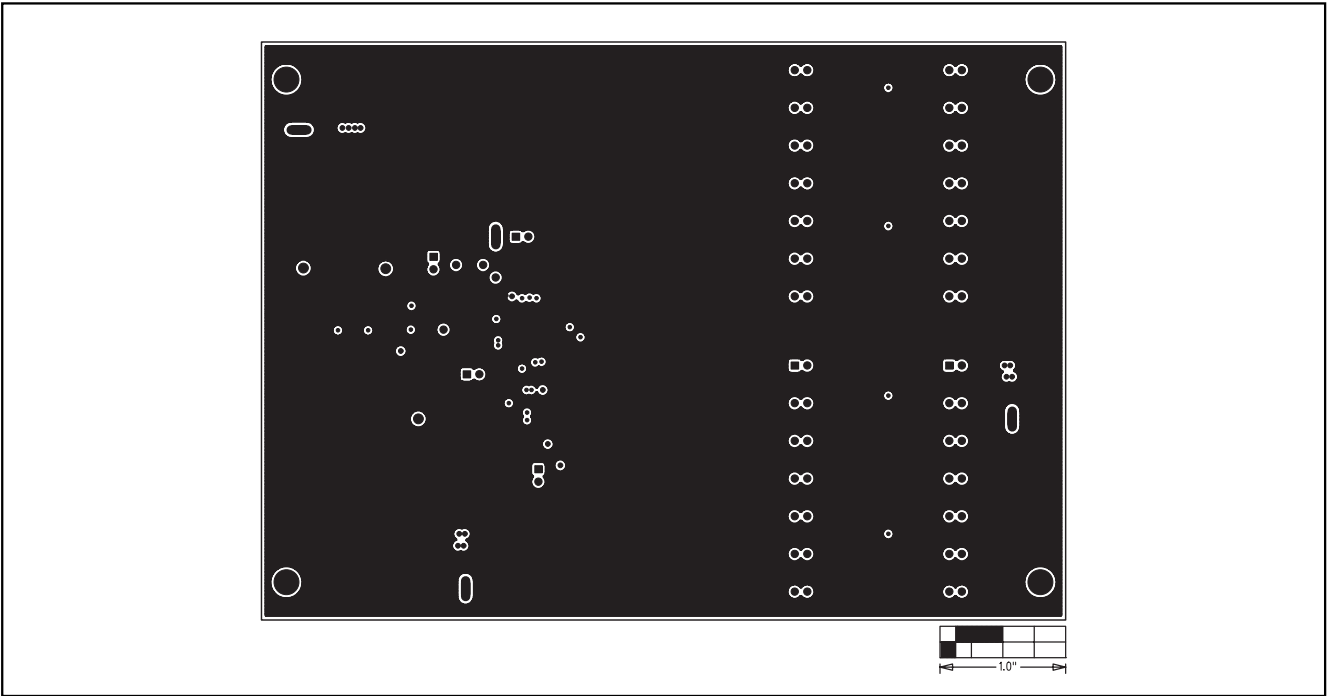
PC Board Layout (Inner Layer 2)—Ground Planes
